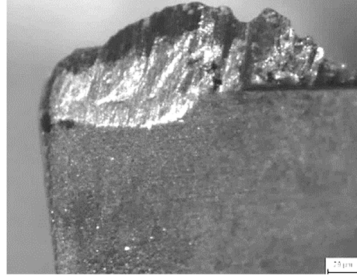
Up edge (built-up) on the tool after machining (without modification and HT)
